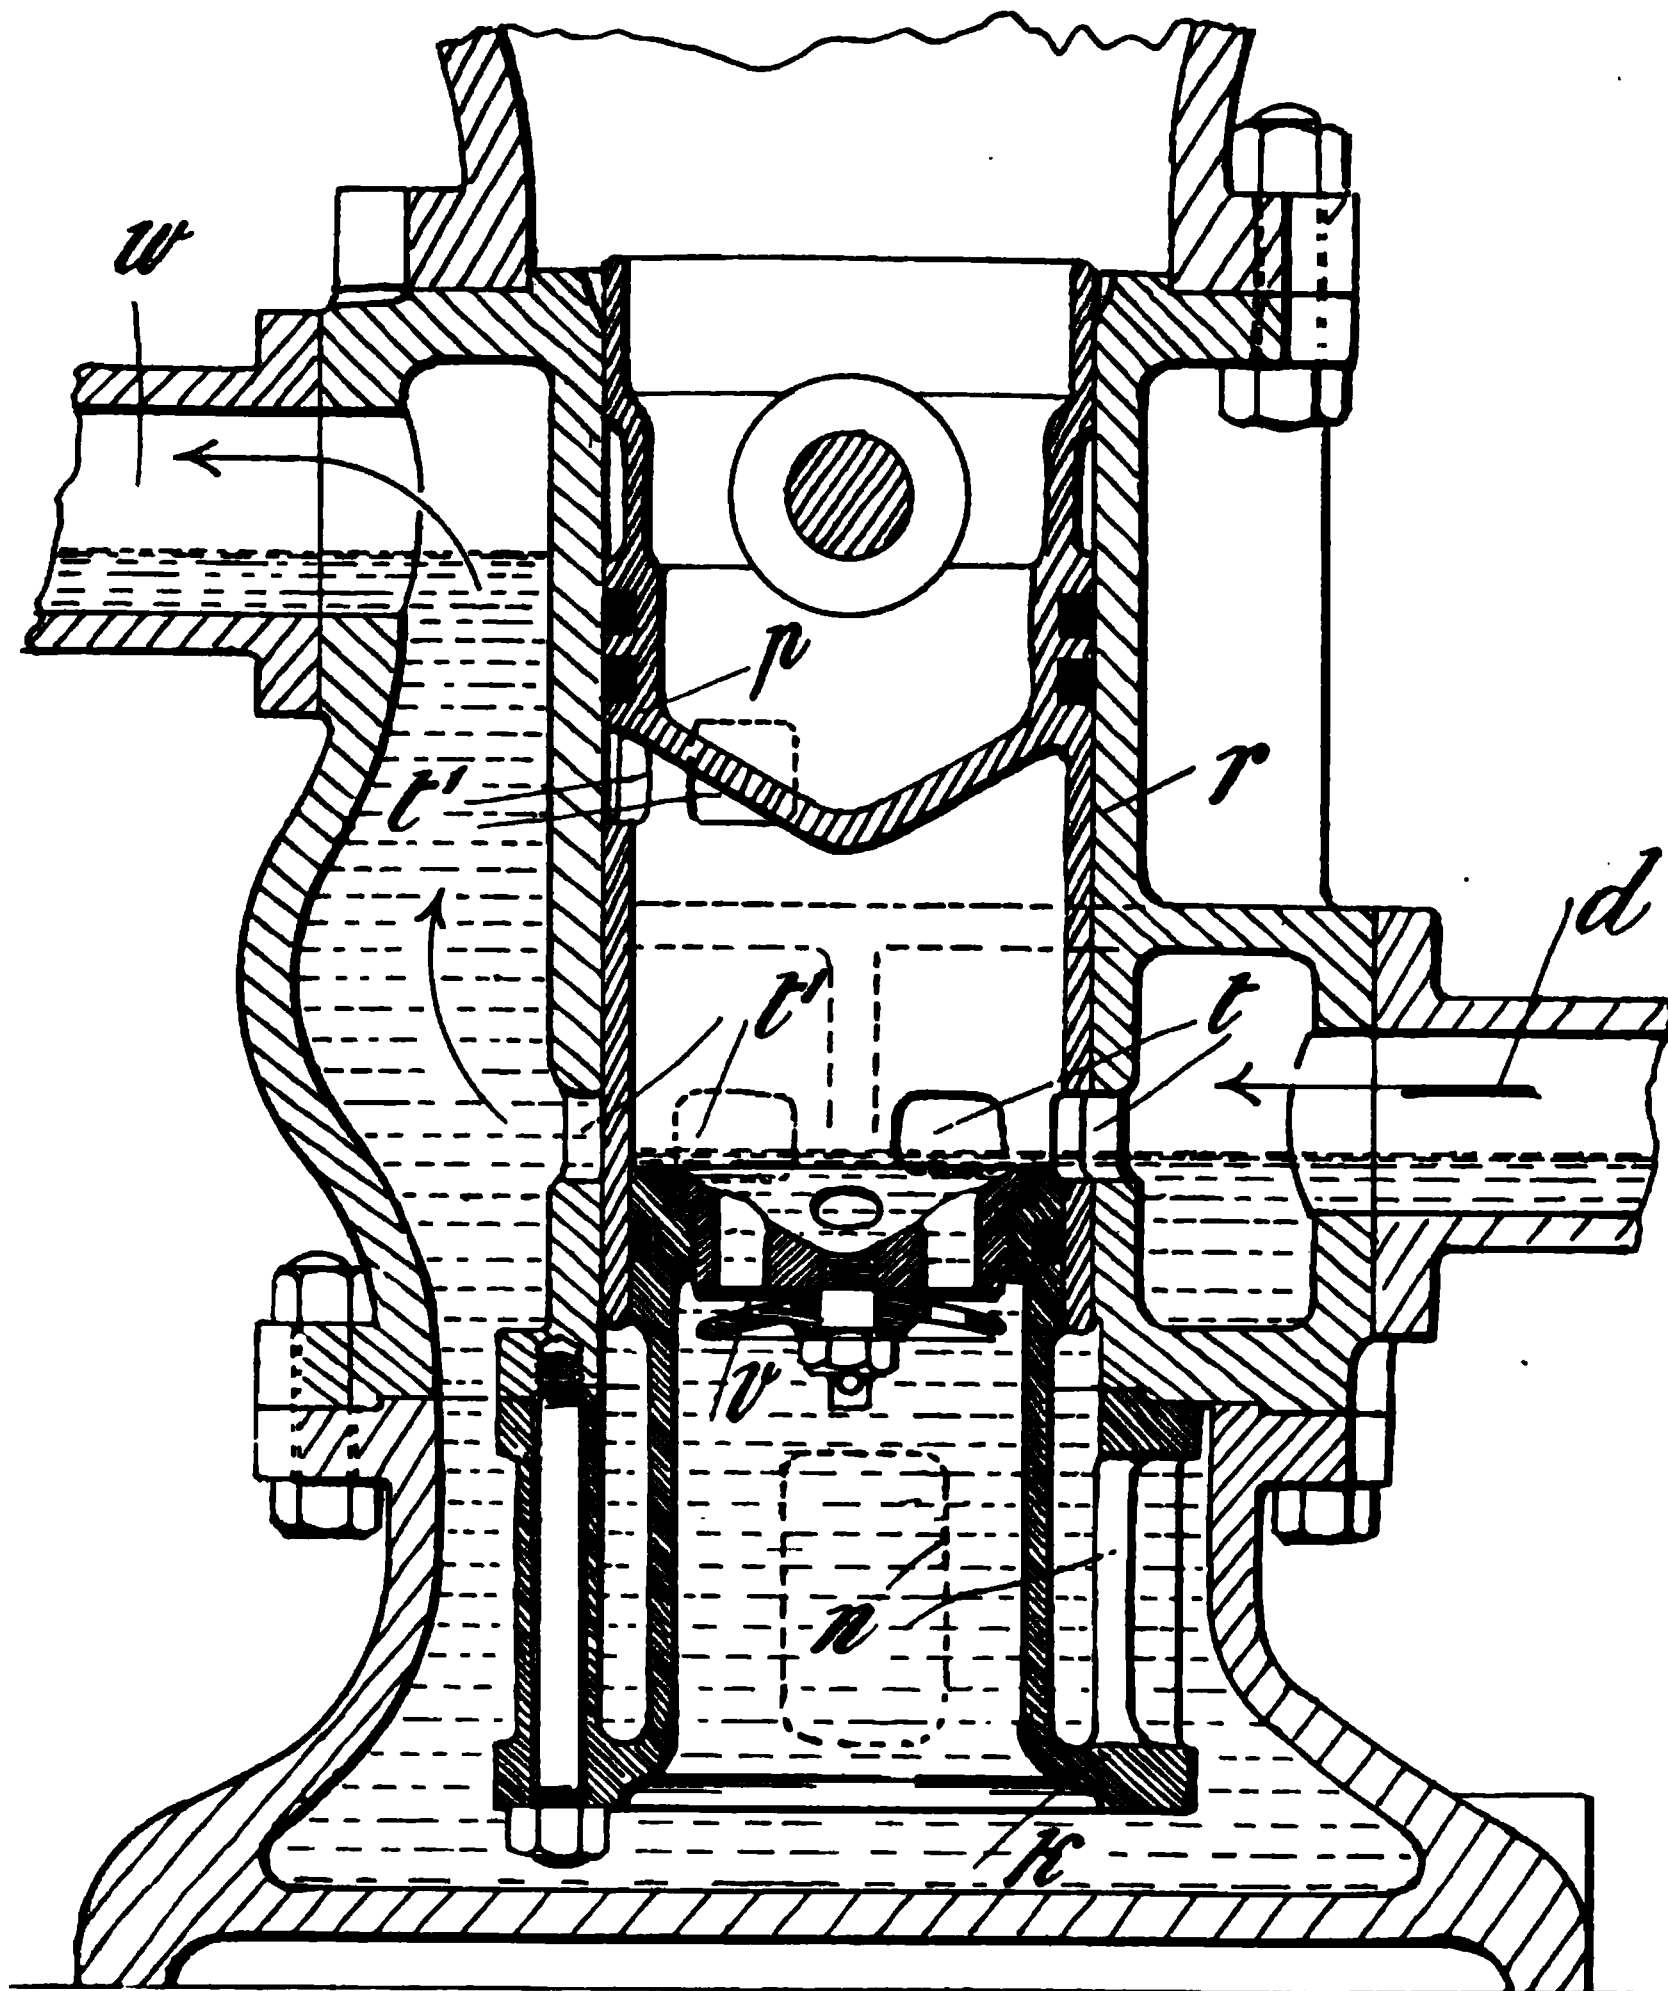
Single-Stage Condenser Vacuum Pump without either Inlet or Outlet Valves (*Butler*).
